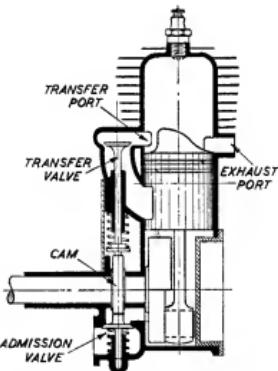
An engine with poppet inlet and transfer valves, operated from a single cam.
